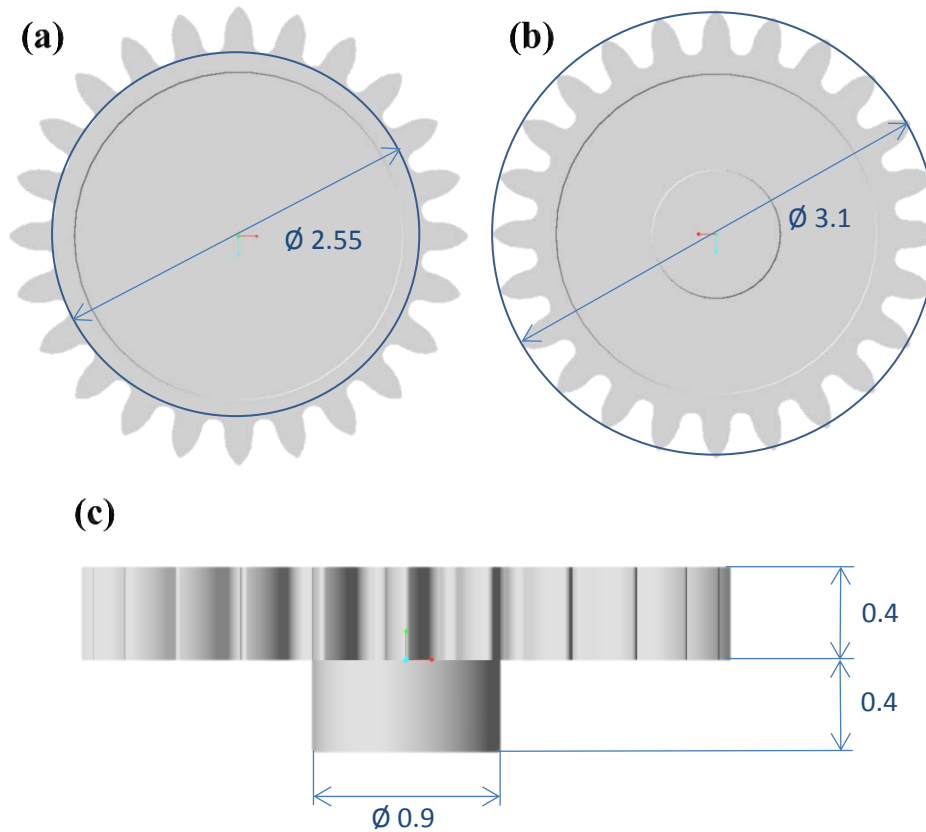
Respectively top view (a), bottom view (b) and front view (c) of the 3D model CAD of the gear.
